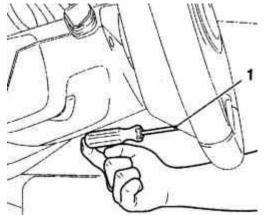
Bolt fastening lining panel switches remote control: 1 - Bolt
